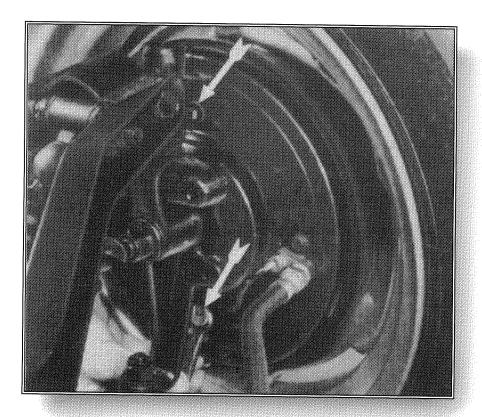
'Adjustment of the front brake shoes, showing the positions of the two adjusters'.
